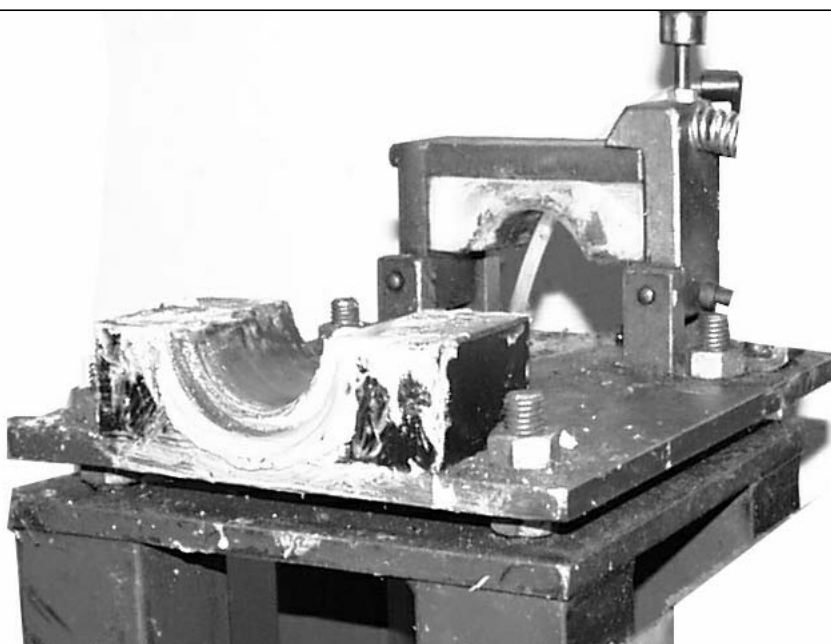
and 3. You will need a fixture in which it is possible to rotate spider and drum.
